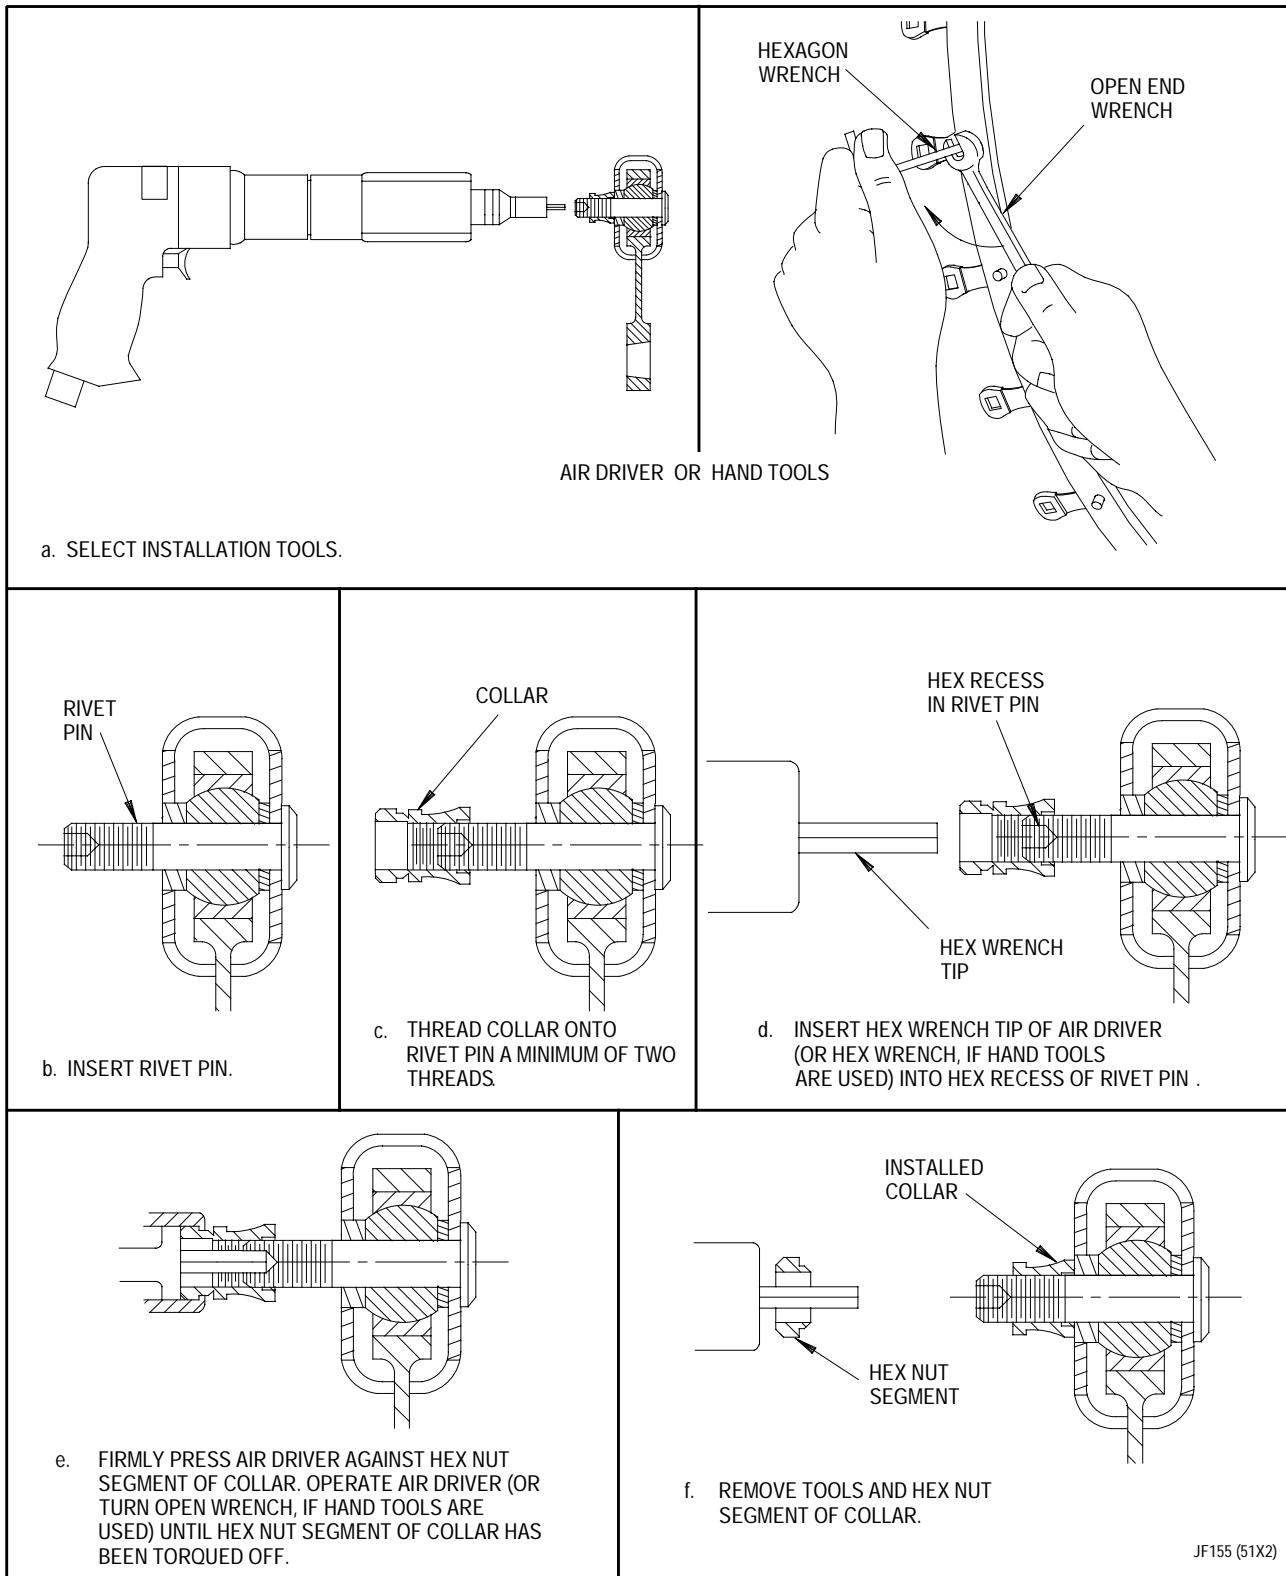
Front Compressor Stator Inlet Synchronizing Ring and Compressor Stator Linkage Lever Arm Assembly - Rivet Pin and Collar Installation Procedure
